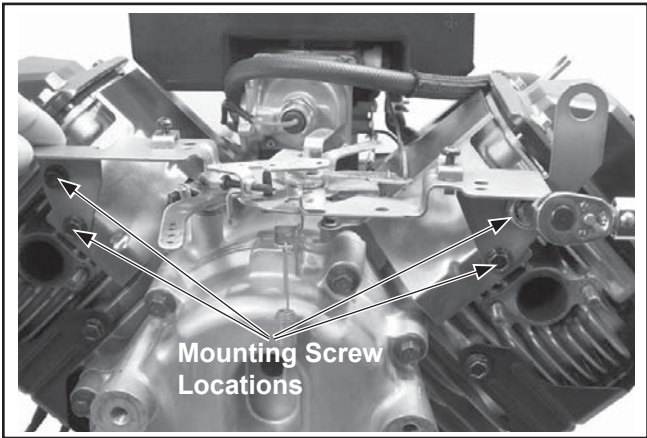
Throttle/Choke Control Bracket Mounting Detail.
